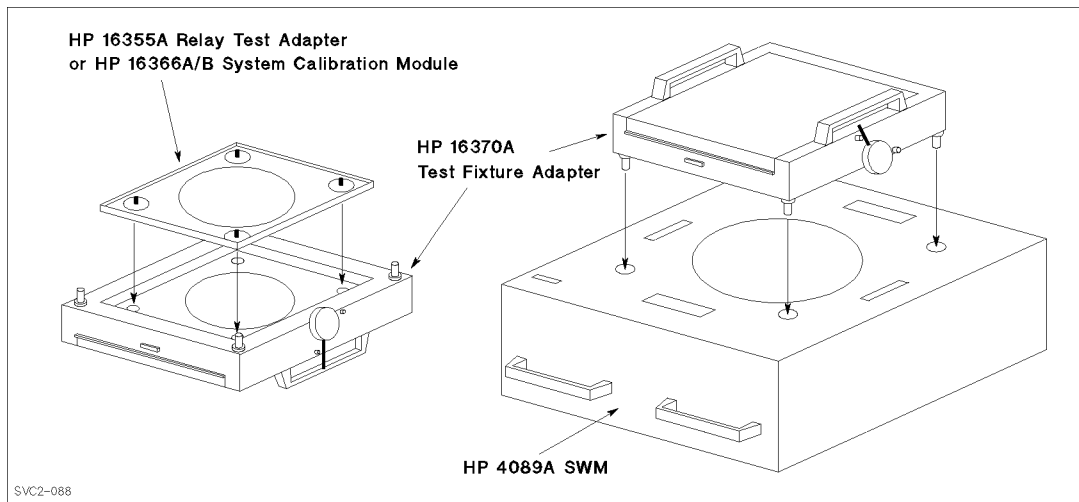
Mounting Test Equipment on the HP 4089A/B 96-pin SWM
